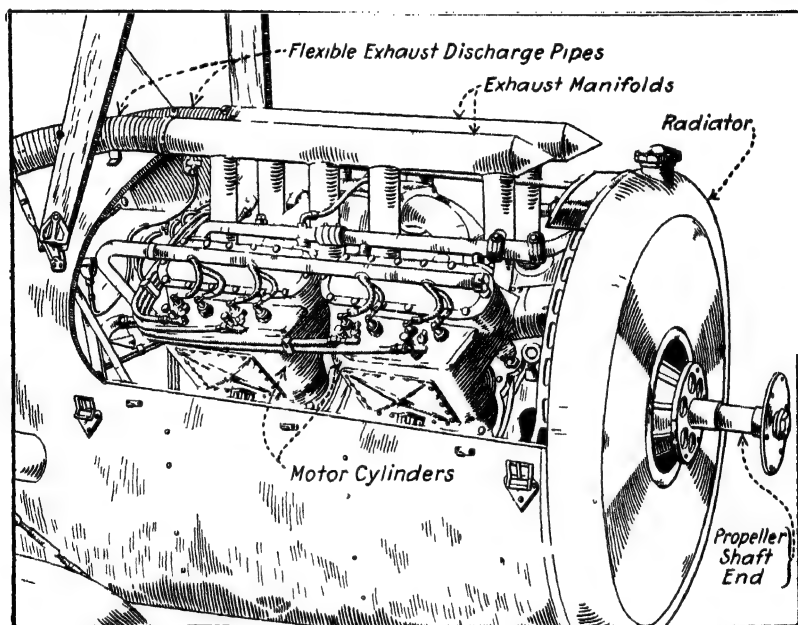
Front View of the Early LWF Tractor Biplane Fuselage, which Used Eight-Cylinder "Vee" Engine. Note Method of Disposing of Exhaust Gases.
